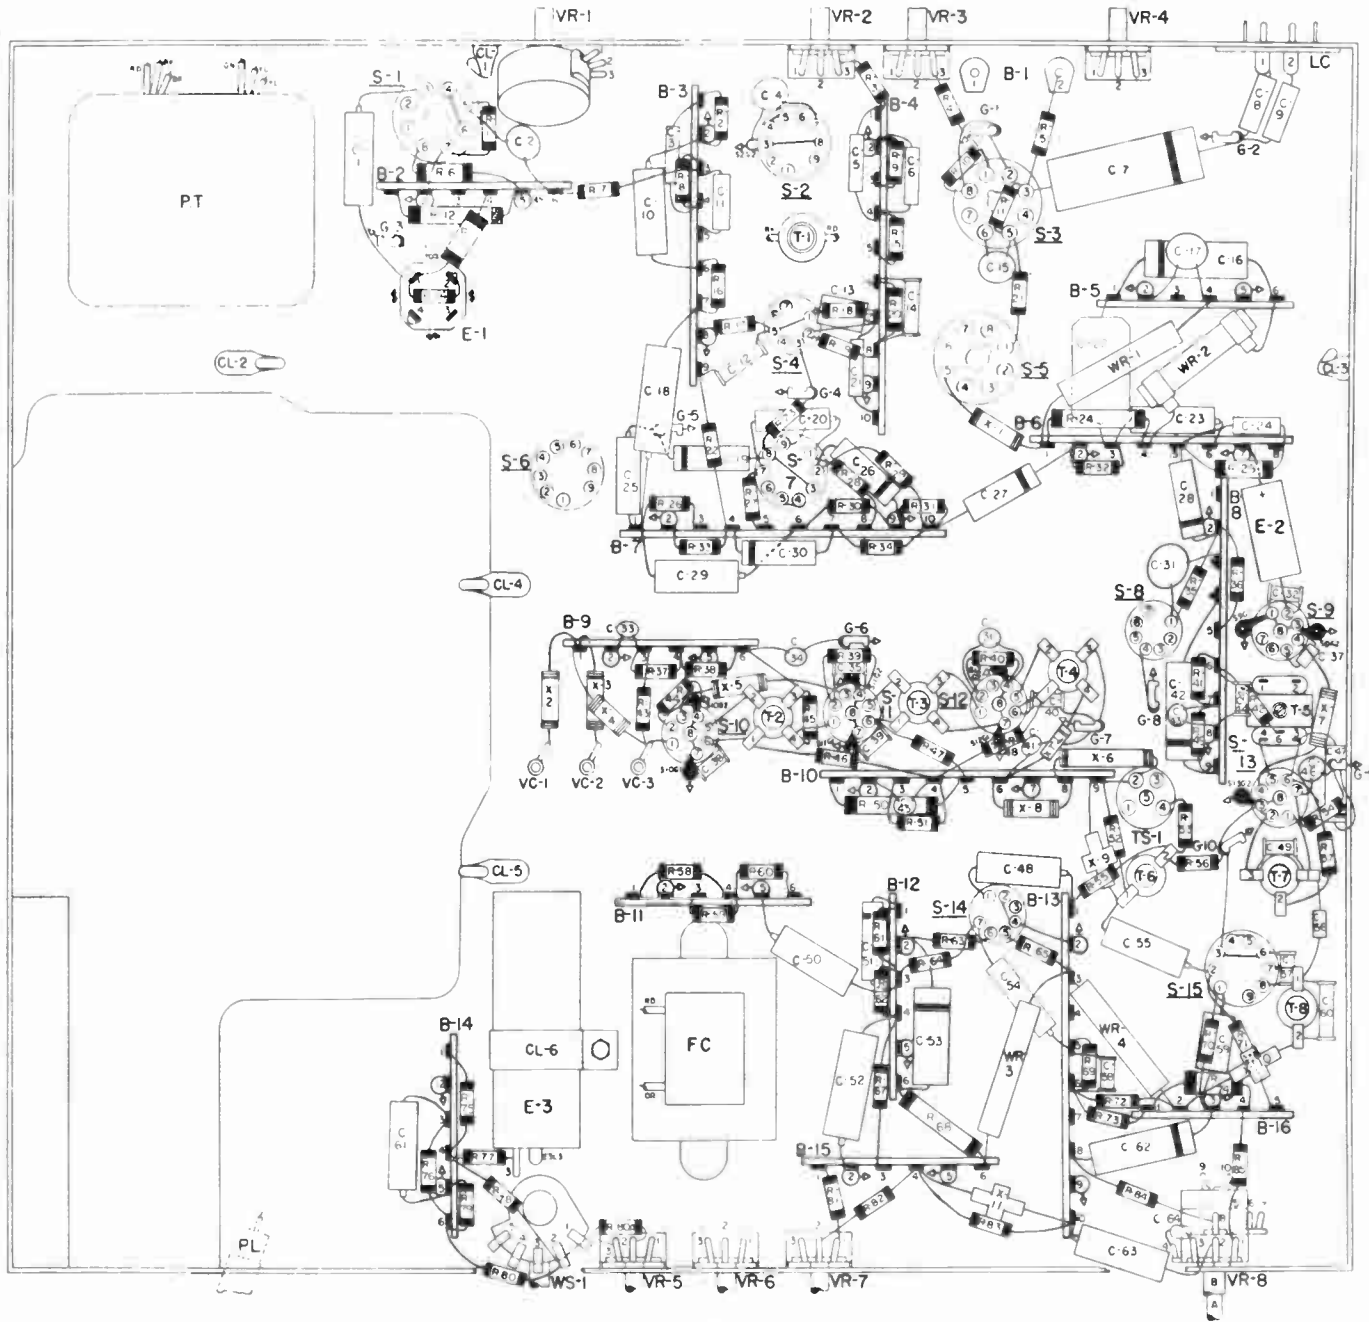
Wiring diagram, bottom view — TV-350 chassis.
